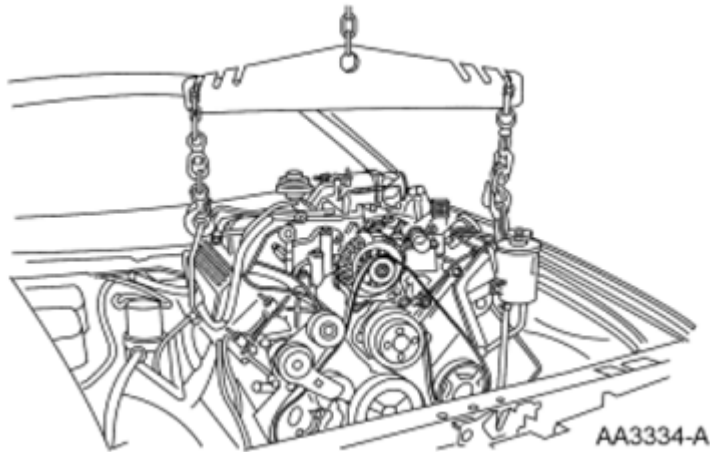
Identifying Engine Lifting Bracket Set (303-DS086)
